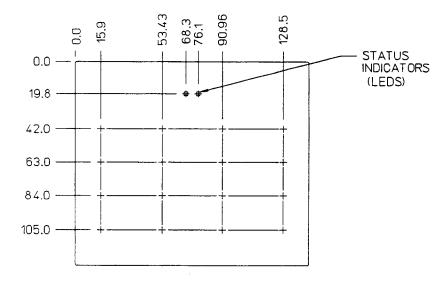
MODULE FRONT 16 COMPONENT GRIDWORK, 3 SLOT MODULE
